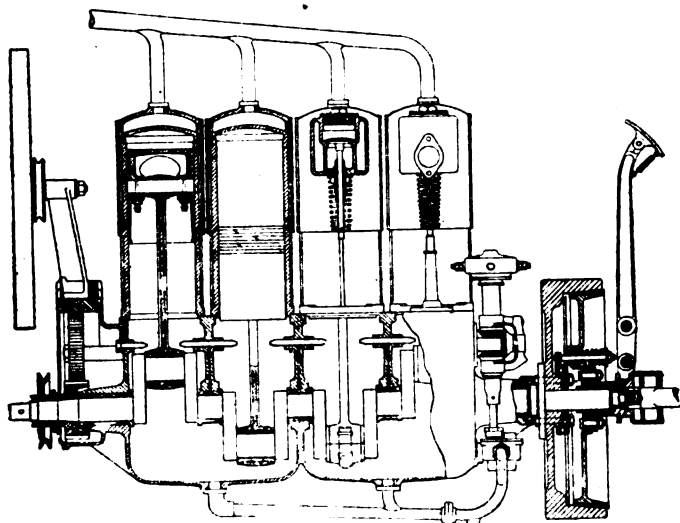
Sectional Elevation of Four-cylinder Engine and Clutch.
